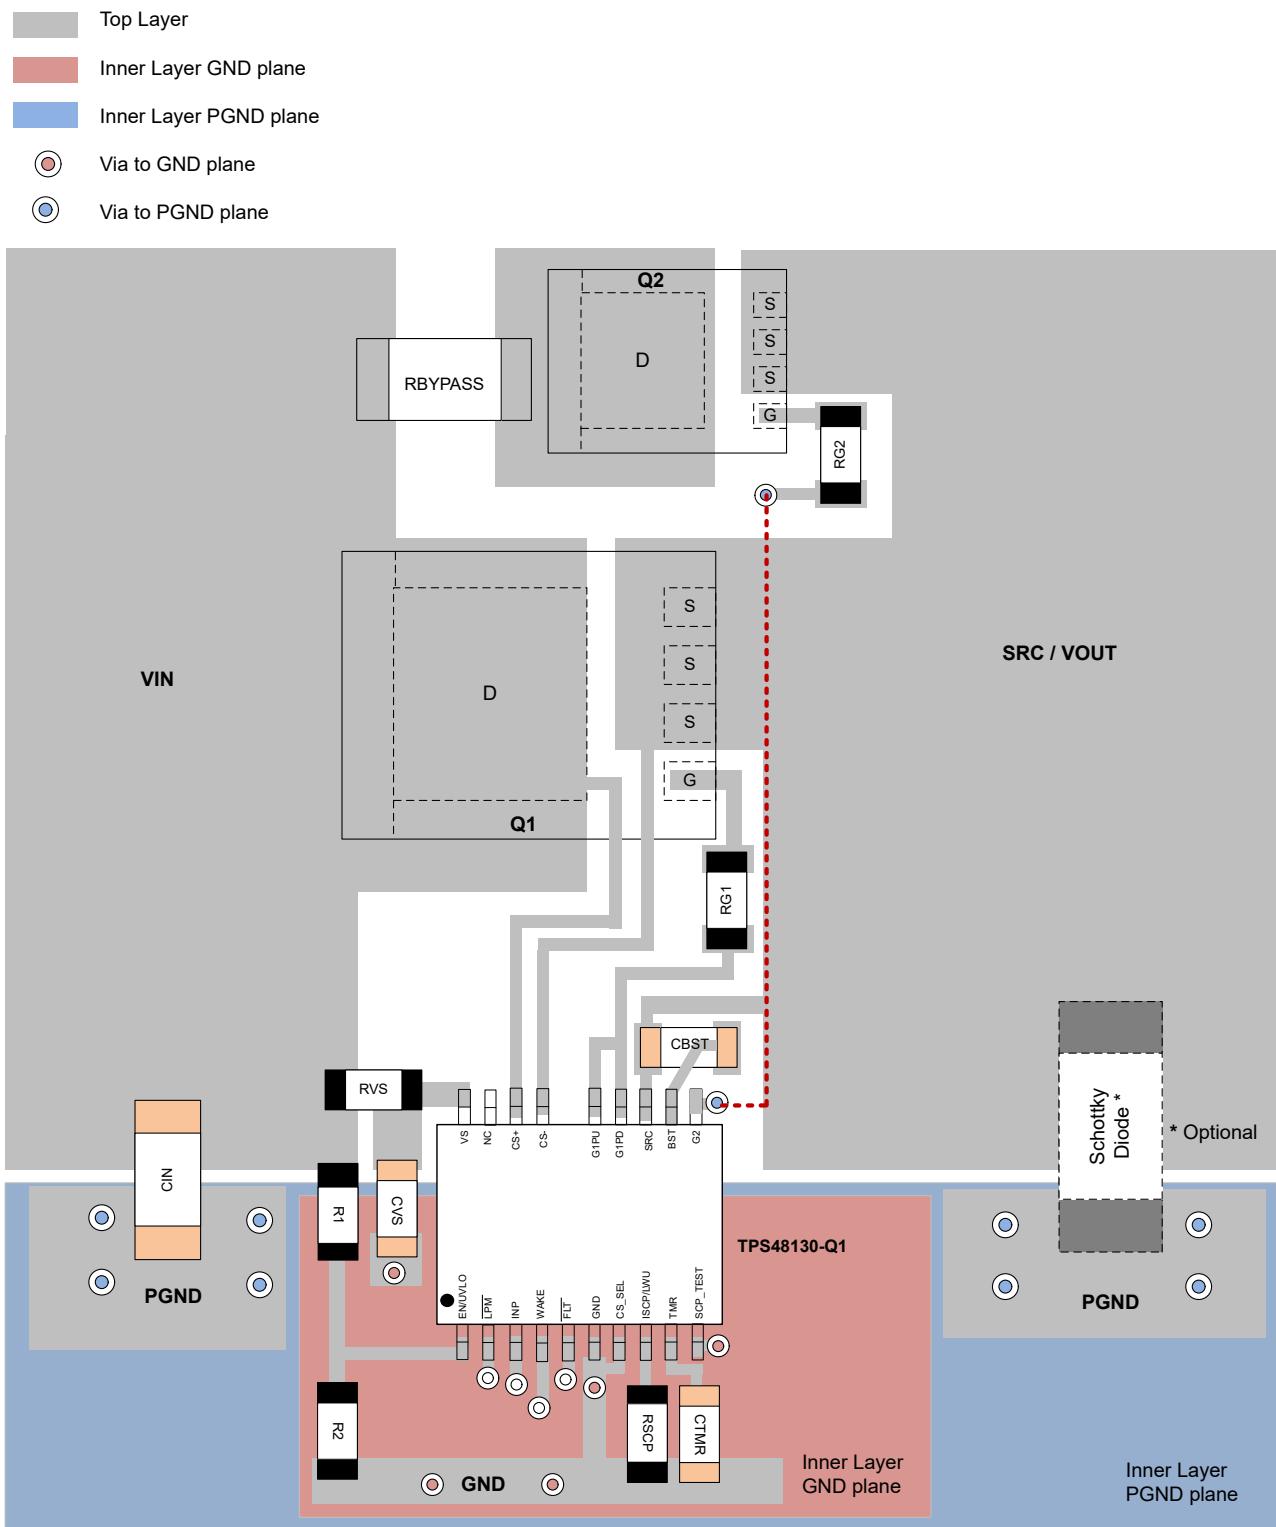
Typical PCB Layout Example for TPS48130-Q1 With Low-Power Path
